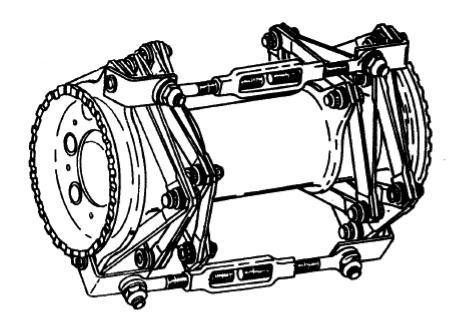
to the Introductory Text of Paragraph (g)(3) – Work Aid Tool Installed on Main Driveshaft
